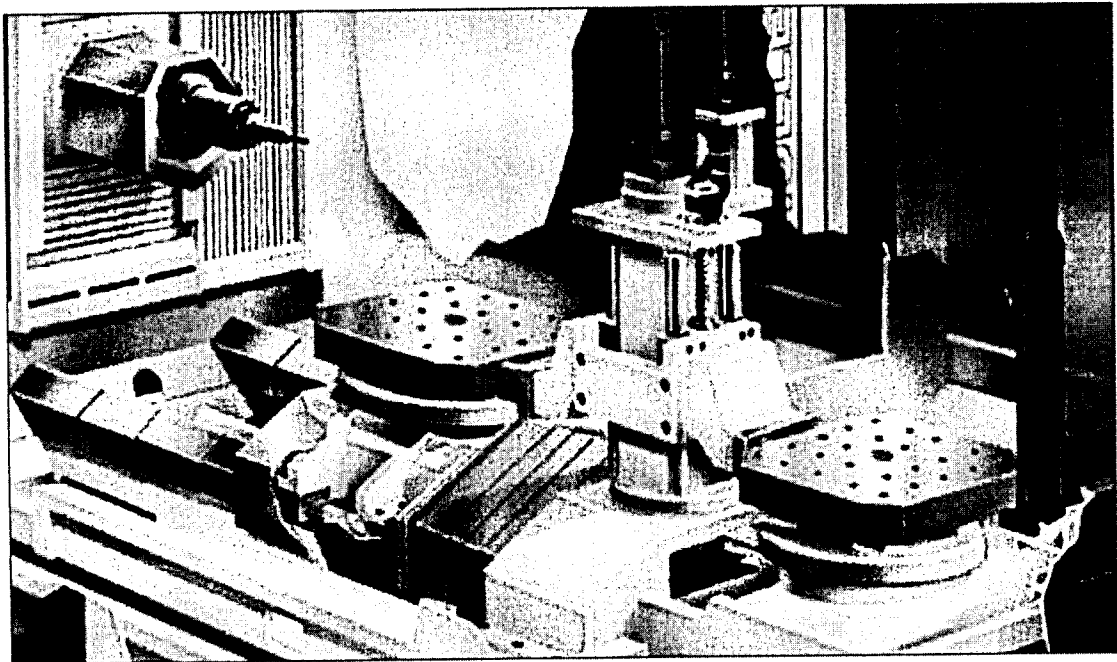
Working table with 180 degrees pallet rotating device and a W-axis, which takes the part to and from the machine spindle. Used in the SPECHT 500WP machine. Source: Cross Huller website (Cross-Huller 2004a)
